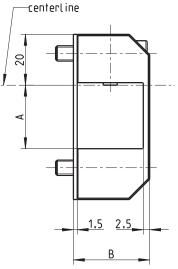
Tool holder for lathe chisel for axially mounted dynamometer, $\mbox{Type 9129AE}...$
